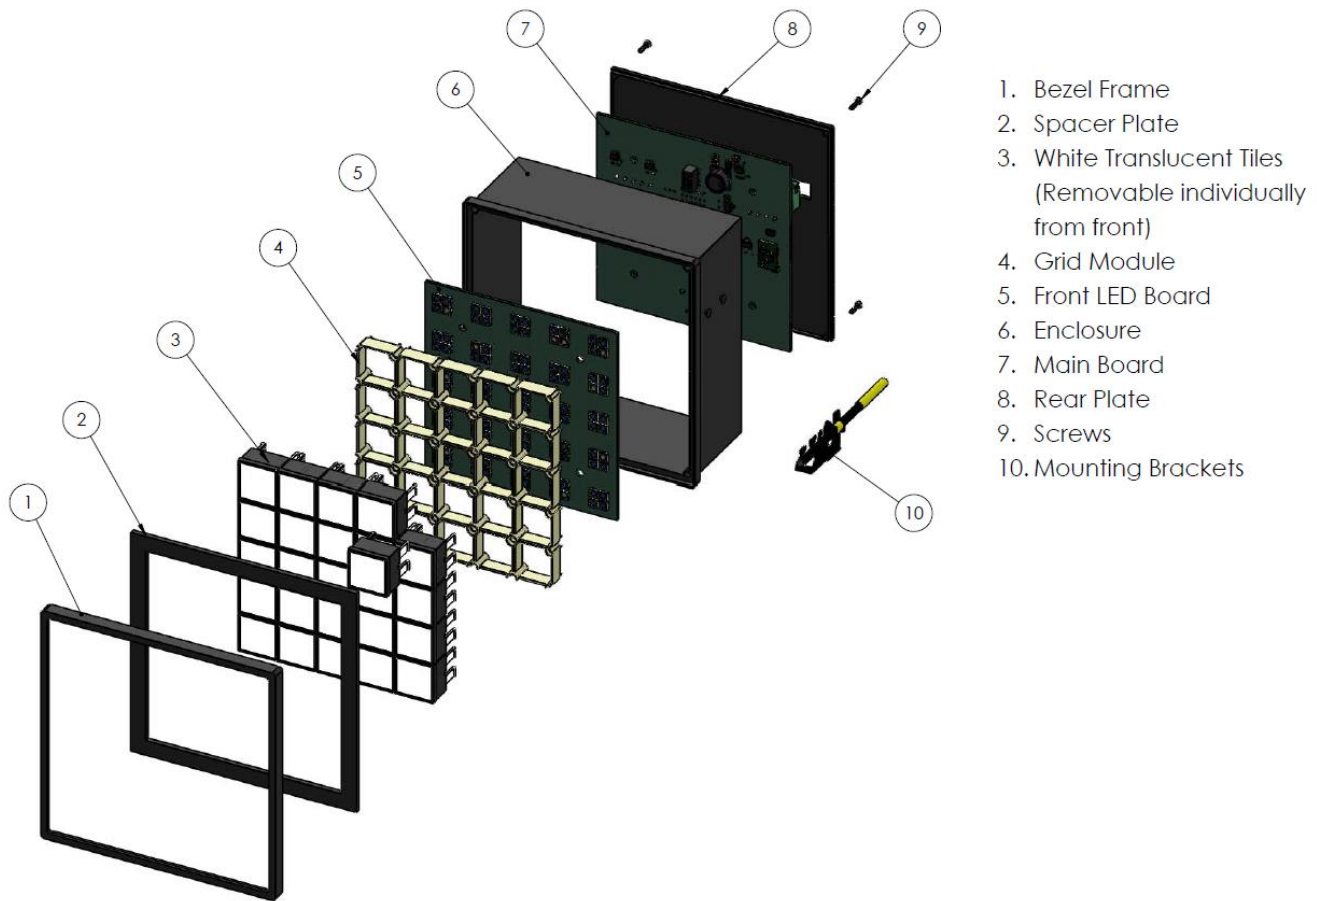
ABB-SANN-5X5 Annunciator Explode View
